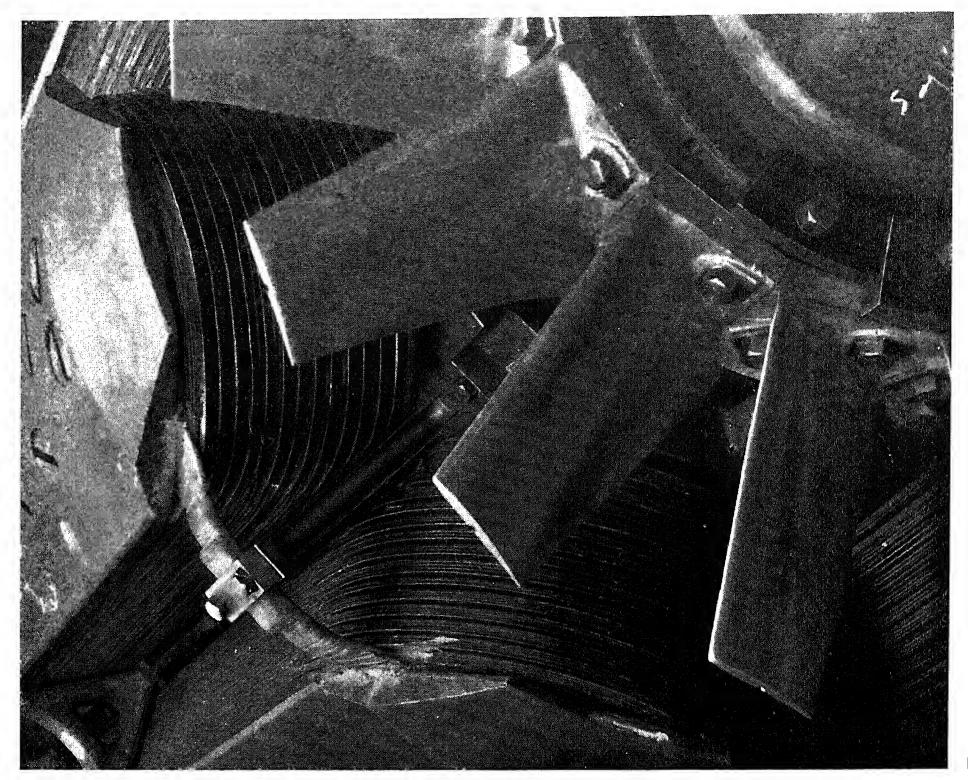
Close-up showing propeller fans mounted on rotor of synchronous condenser.
